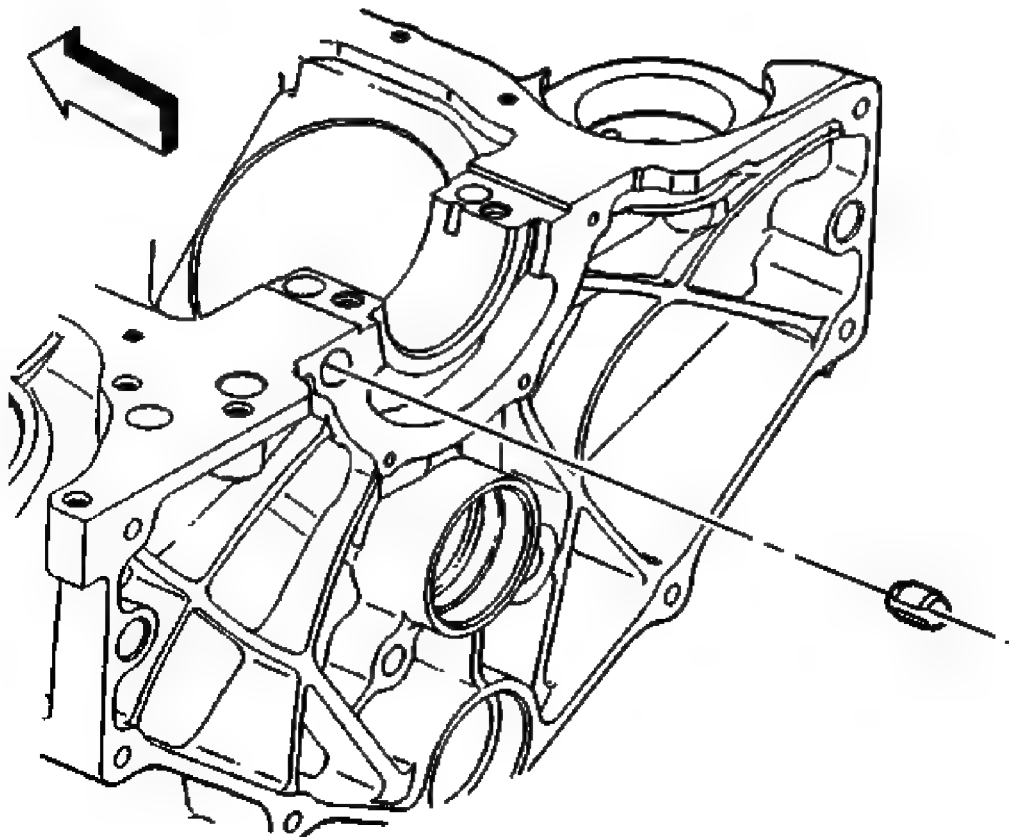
Locating Crankshaft Rear Oil Seal Housing Locator Spring Type S Pin
